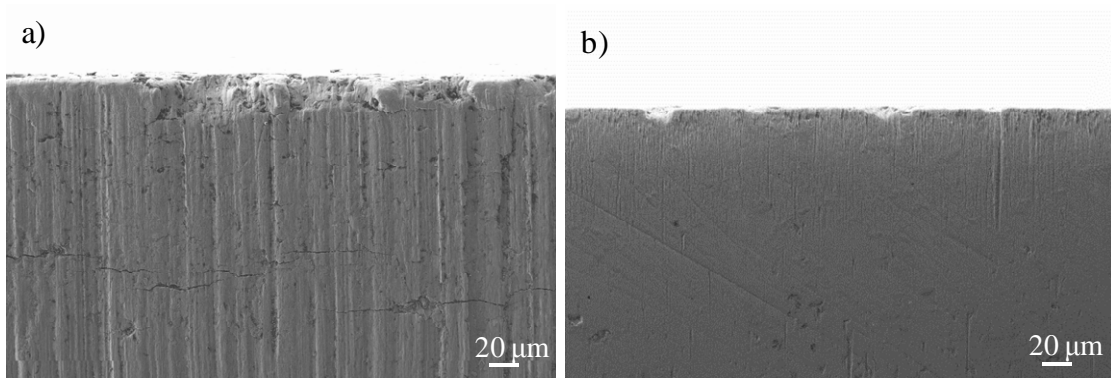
Images of the flank face of the lower tool at 10000 strokes: a) 1.2379 and b) UNIVERSAL
